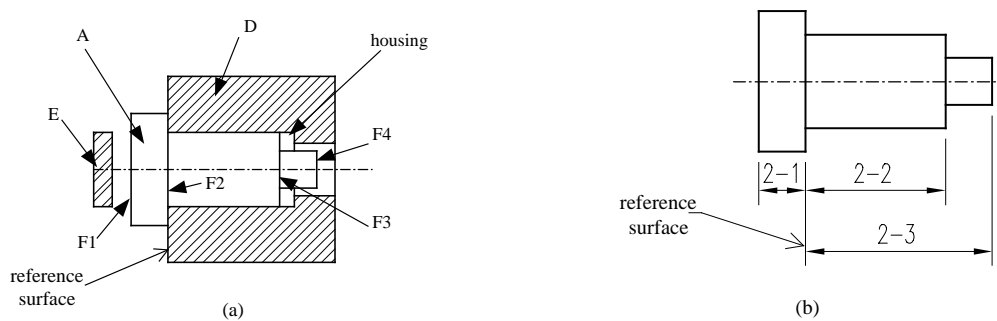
(a) Working conditions of an assembly; (b) Resulting axial dimensions for part A (Ropion, 1974)
